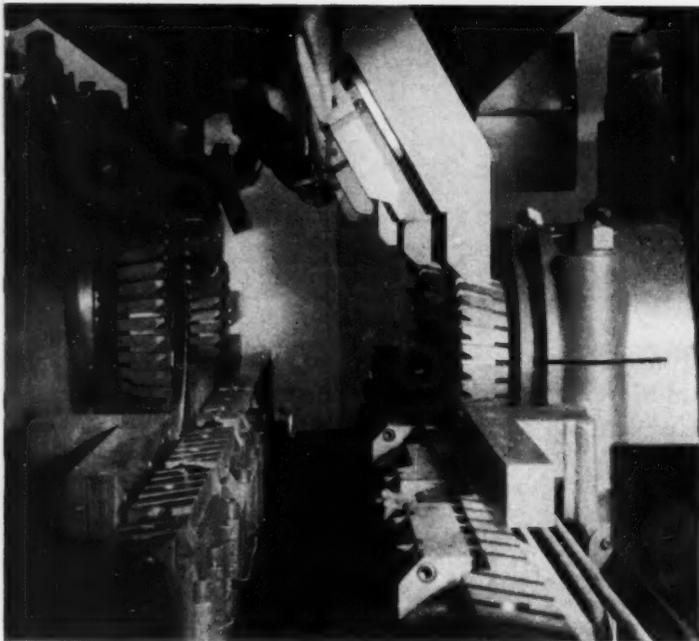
View through the "work tunnel" from the discharge end, showing arrangement of cutters, self-cleaning supports for work, transferring, locating and clamping members and chip disposal trough
